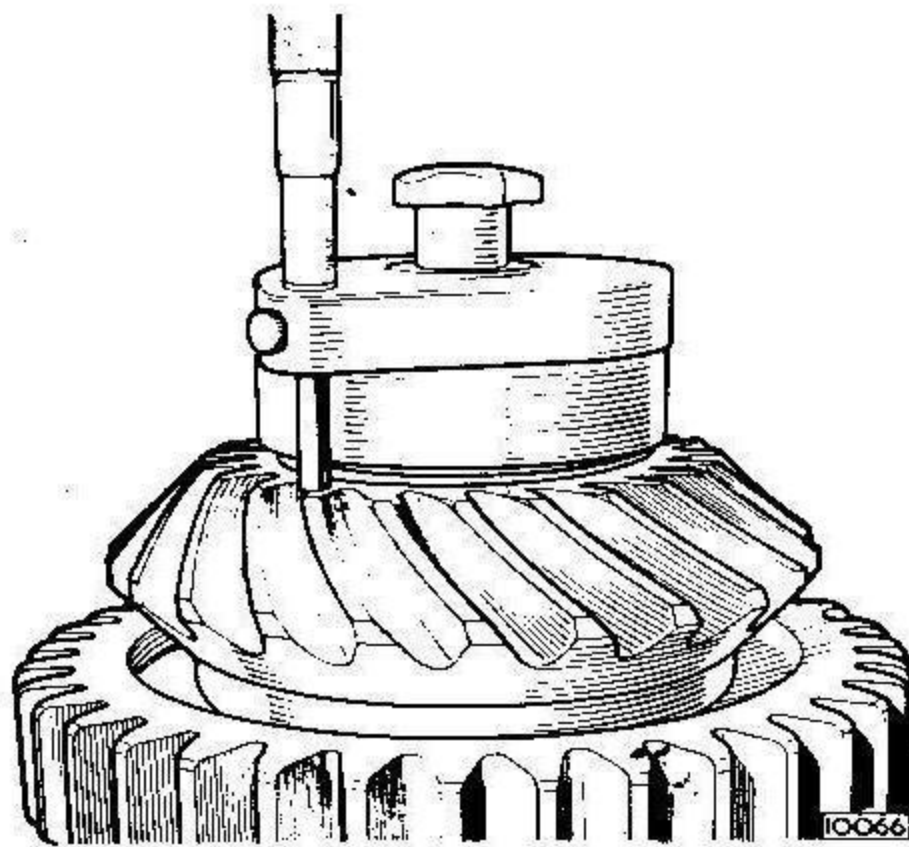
Checking the depth between the bevel face and inner bearing with a micrometer depth gauge
